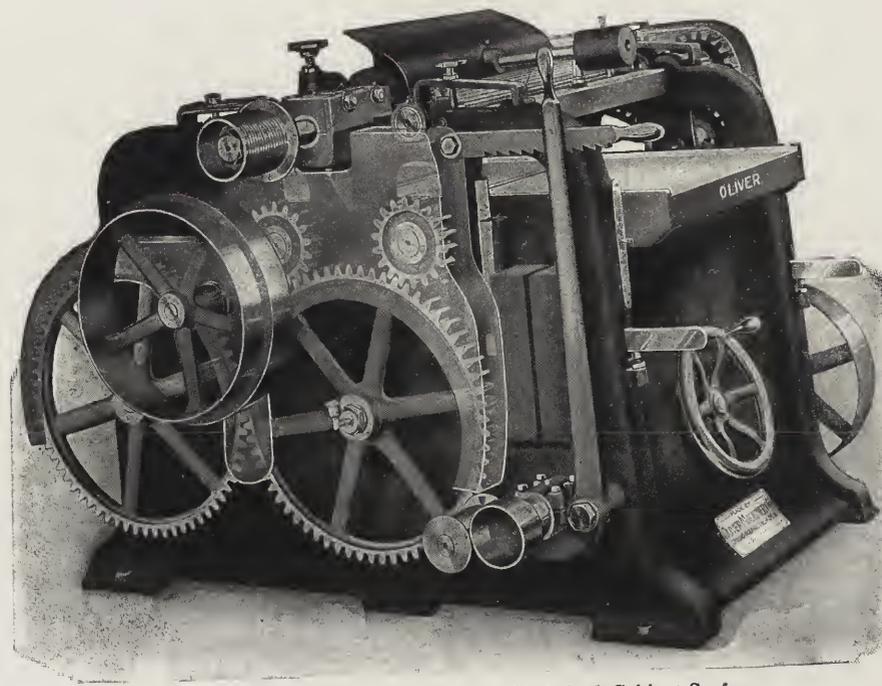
Four-roll Single-cylinder Double-belted Cabinet Surfacers.
